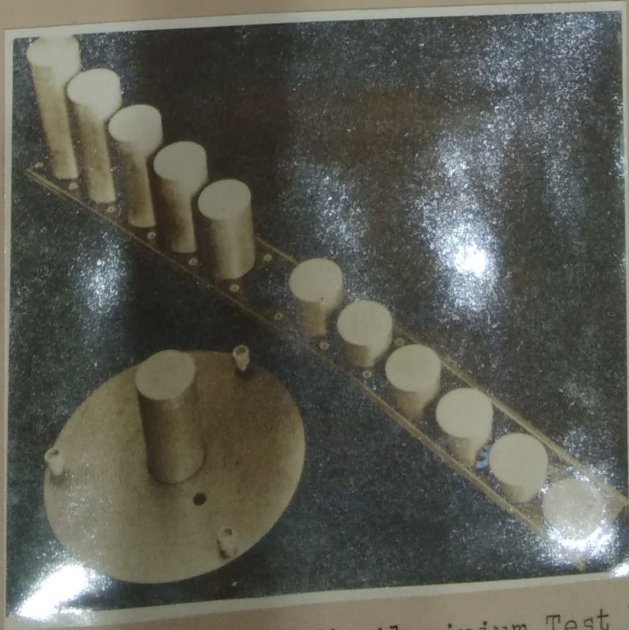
The Set of A.S.T.M. Aluminium Test Blocks.
